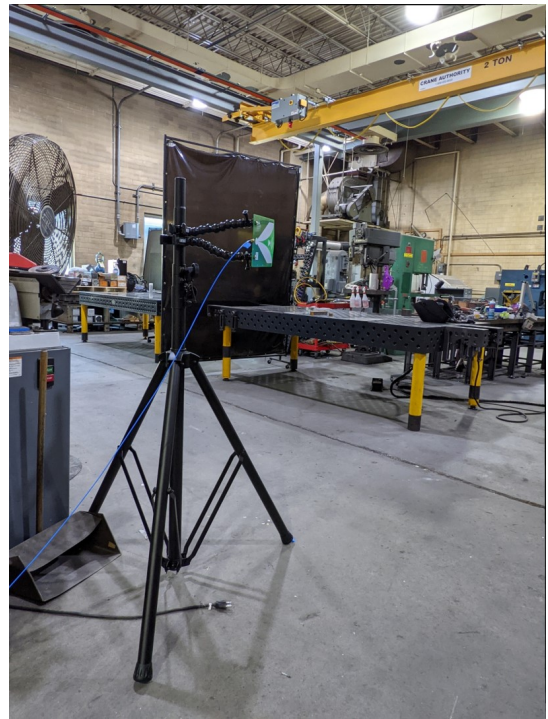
The NIST machine shop welding station and measurement antenna
